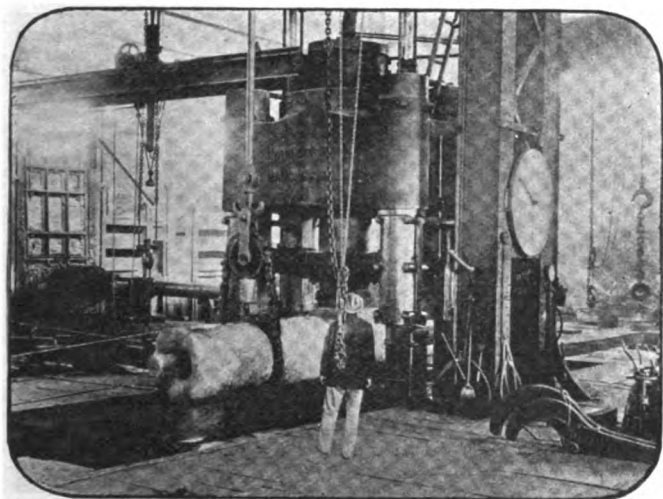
Forging 12" rifle jacket under 3,000-ton press.
